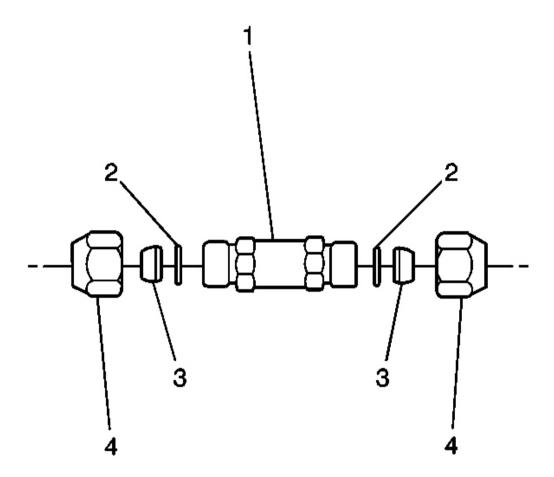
A/C Refrigerant Filter Components Courtesy of GENERAL MOTORS CORP.
